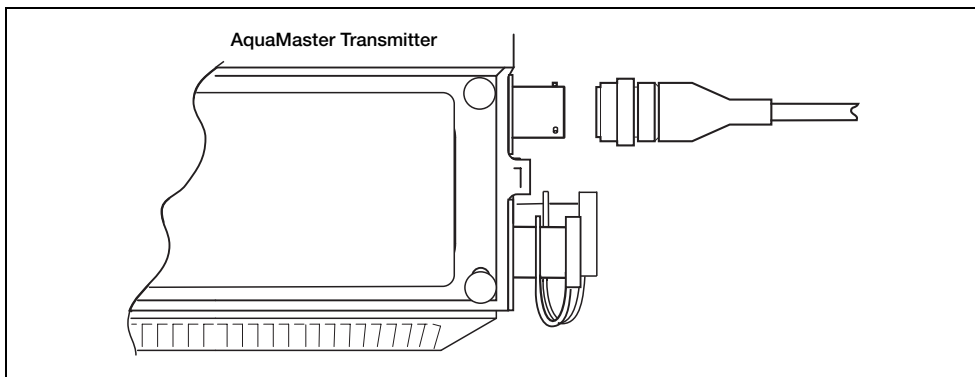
Sensor Cable Connections (Connector, Remote version)
